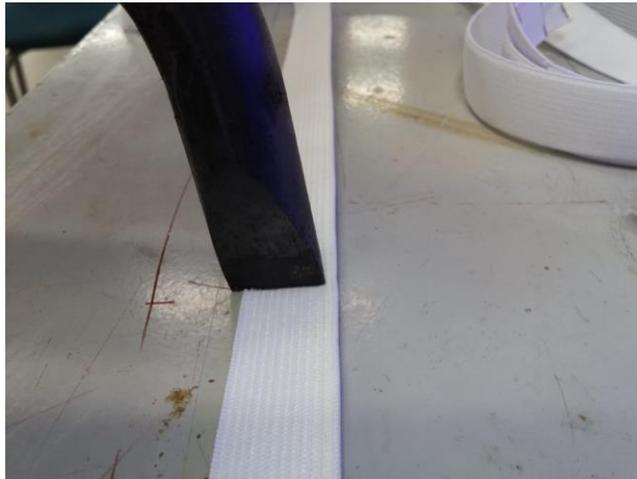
Cutting of elastic band by means of hot knife – soldering iron.
